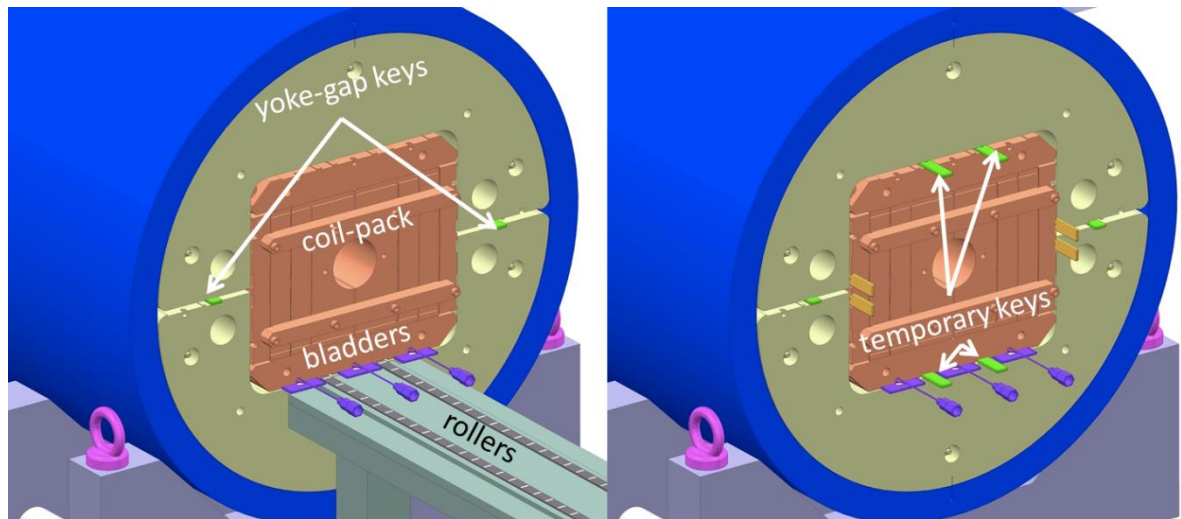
Lifting the coil-pack, removing the rollers.
